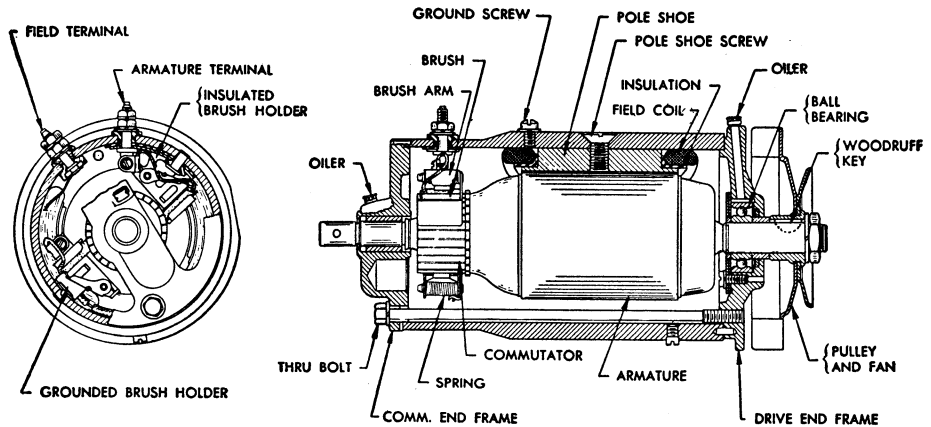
Exploded view of generator similar to that shown in Fig. 1
